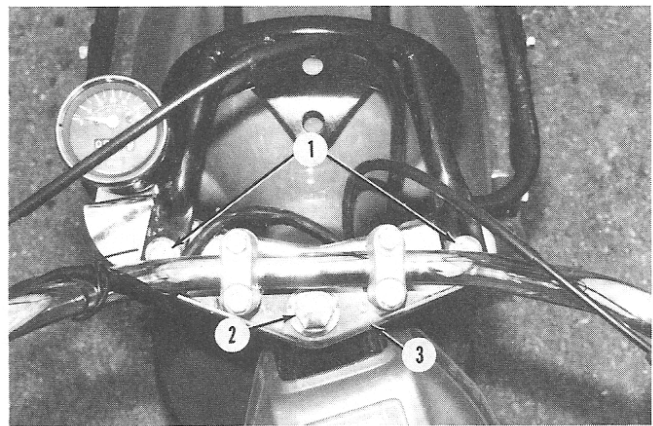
Fork cap screws (1) and bracket nut (2) retain steering bracket (3).
